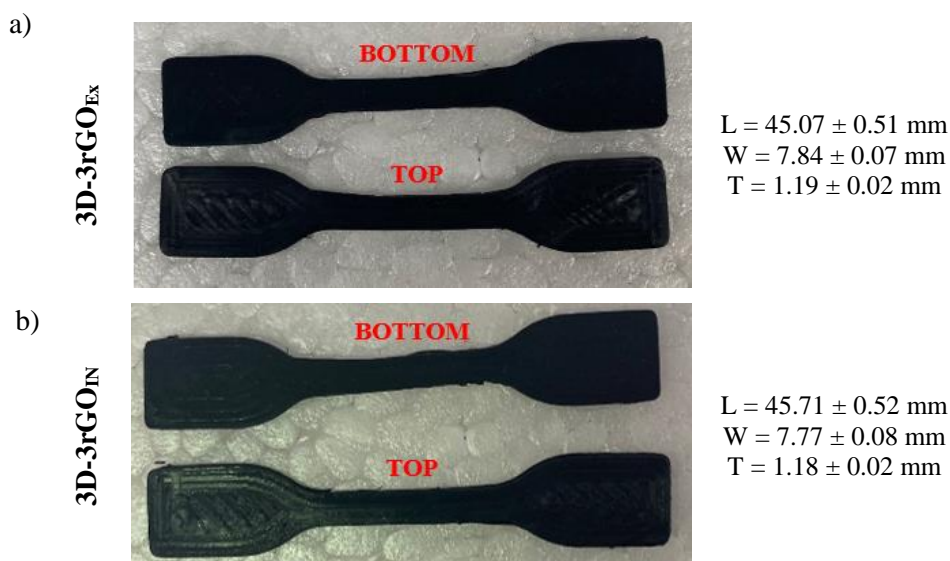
Photographs of WBPUU/rGO 3D printed parts by FDM
